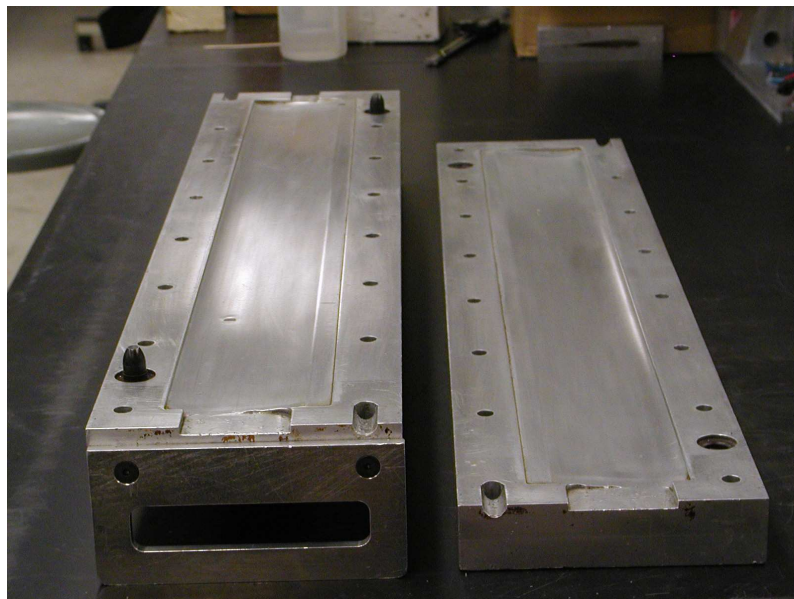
SC1095 mold used to manufacture the full scale blade.
